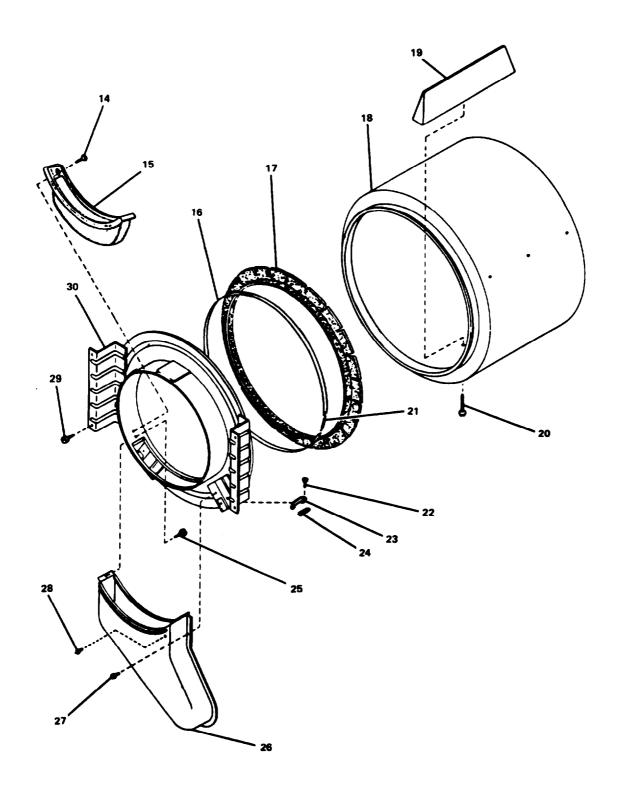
Dryer Front Bulkhead and Cylinder Assembly (Sheet 2 of 2).
